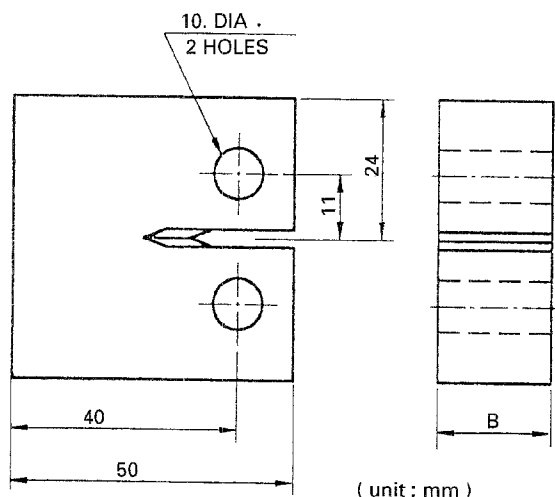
Dimension of the compact-tension specimen for fracture toughness testing. $B = 20$ mm for plane-strain K_{IC} test; $B = 8.9$ mm for plane-stress K_C test.
